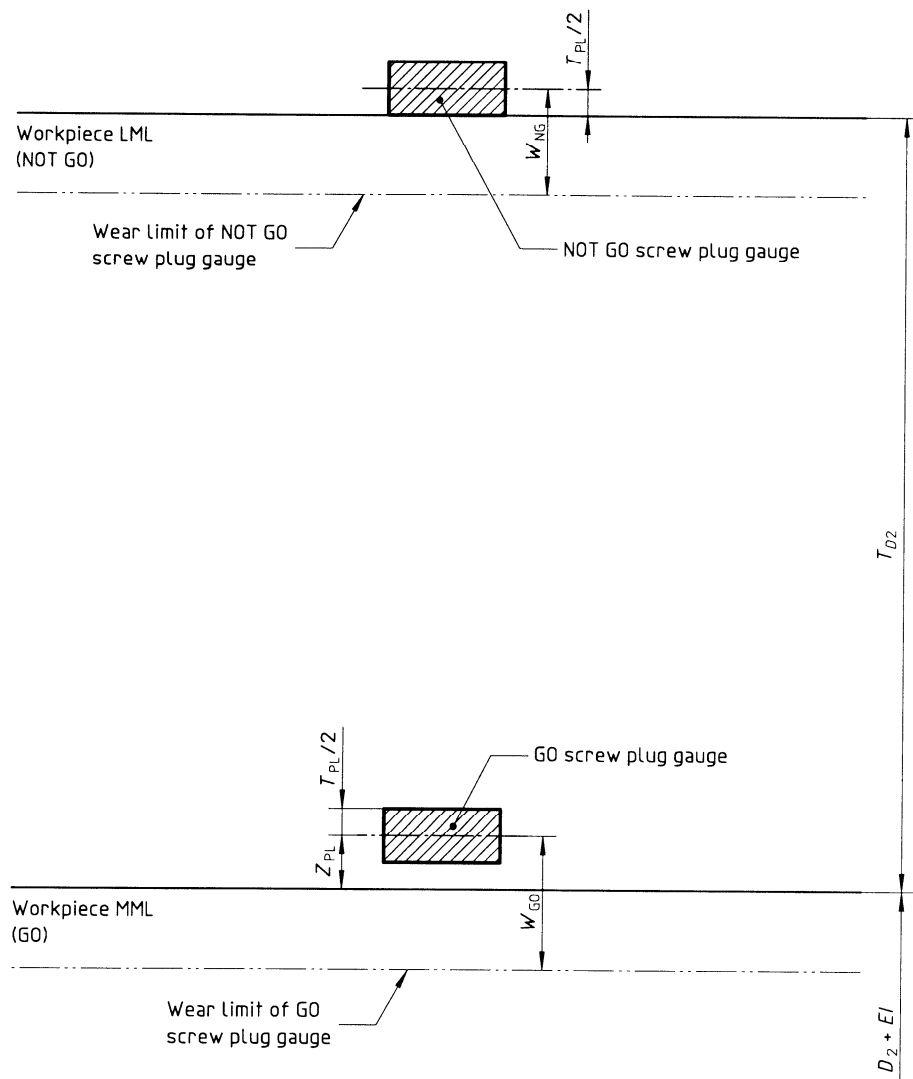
Tolerance zones for the pitch diameter of gauges for internal threads (diagram)
